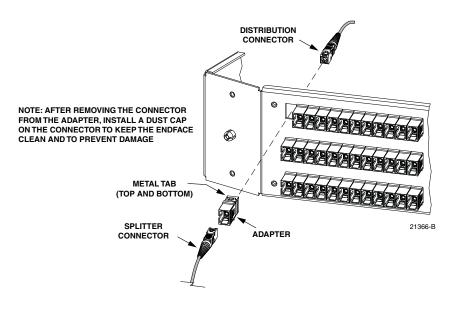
Adapter Removal and Replacement - Typical Distribution Panel
